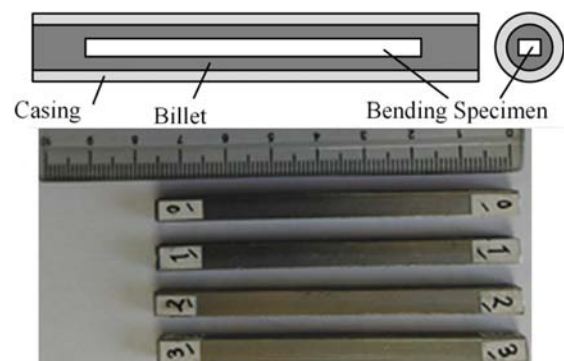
Schematic and real appearance of the bending specimens before three-point bending test.
